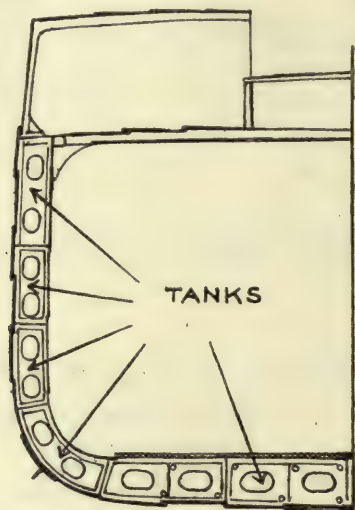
HALF SECTION OF SIDE TANK STEAMER.
